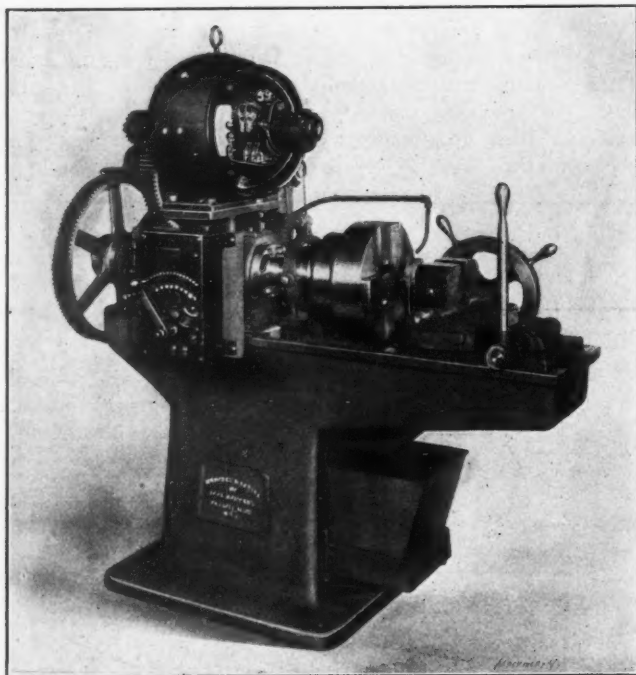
Motor-driven Pipe Threader with Complete Electrical Equipment
